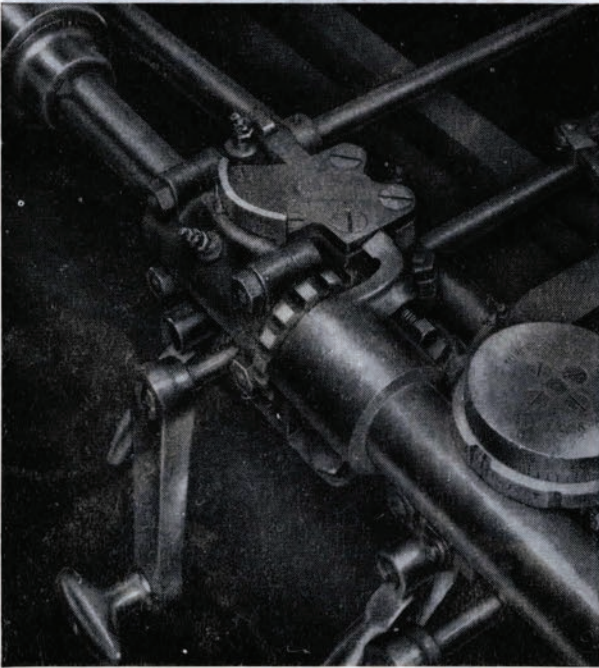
Simple Type Speed Setting Mechanism—Spindle OUT.
